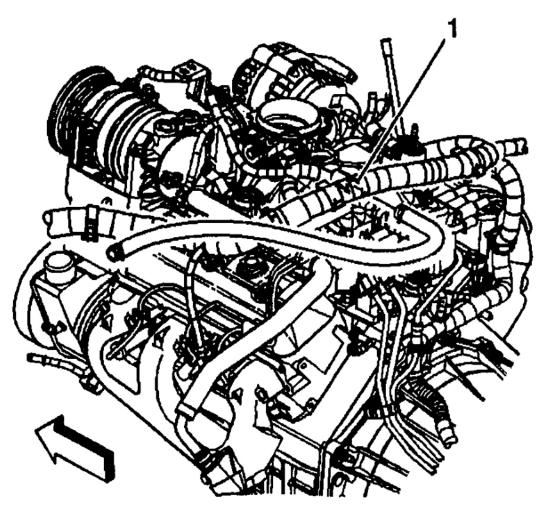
View Of Radiator Inlet Hose, Clamps & Thermostat Housing Courtesy of GENERAL MOTORS CORP.
